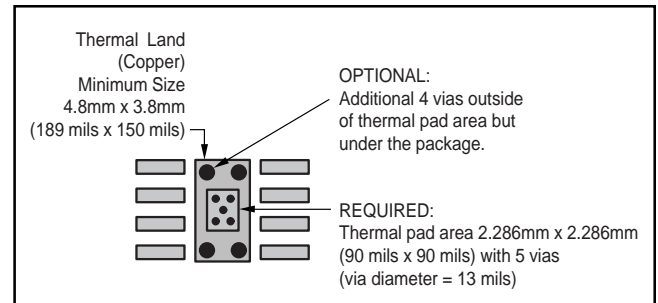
8-Pin PowerPAD PCB Etch and Via Pattern.
